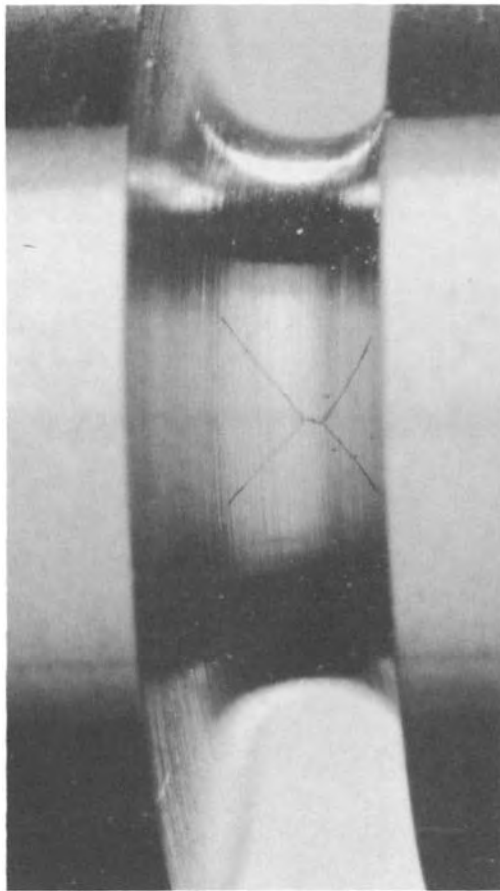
Close-up of a reduced area on a medium-carbon steel drive shaft showing the X-shaped crack pattern characteristic of reversed torsional fatigue. Reversed torsional fatigue causes approximately 45° spiral fatigue cracks on opposite diagonals. The original shear crack was in the longitudinal shear plane; then each pair of torsional fatigue cracks developed at a 45° angle to the shaft axis.
